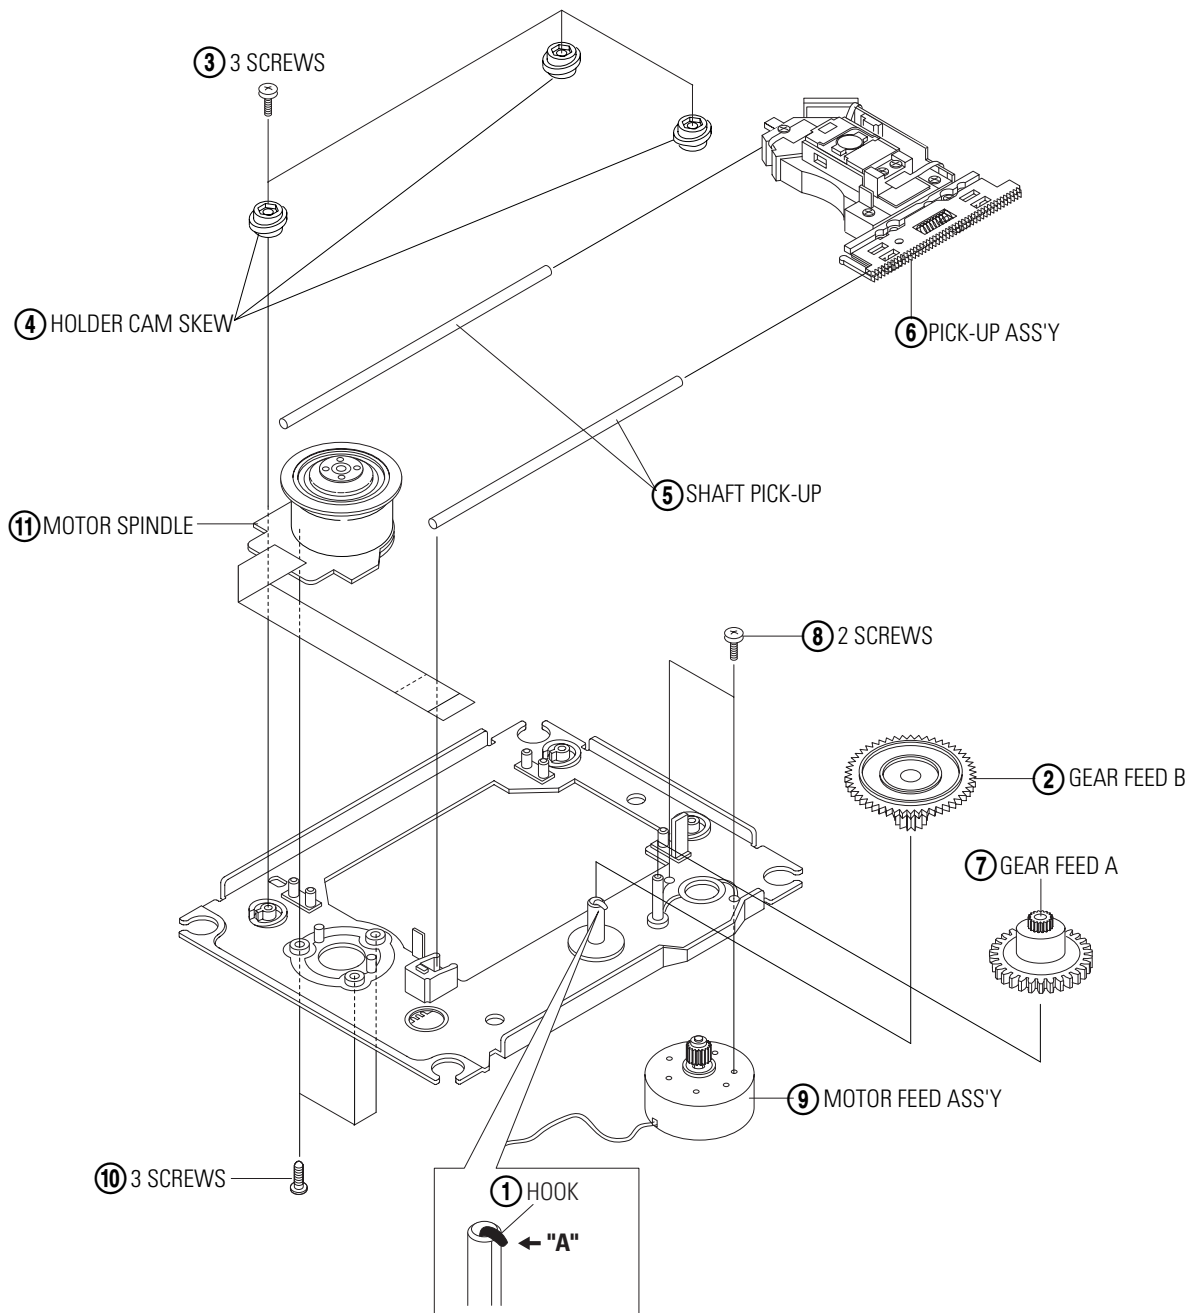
Disassembling the Assembly-Bracket Deck
